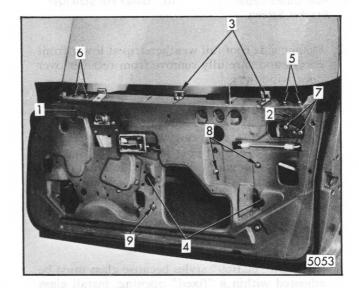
Window Removal and Adjustment - "F" Styles
